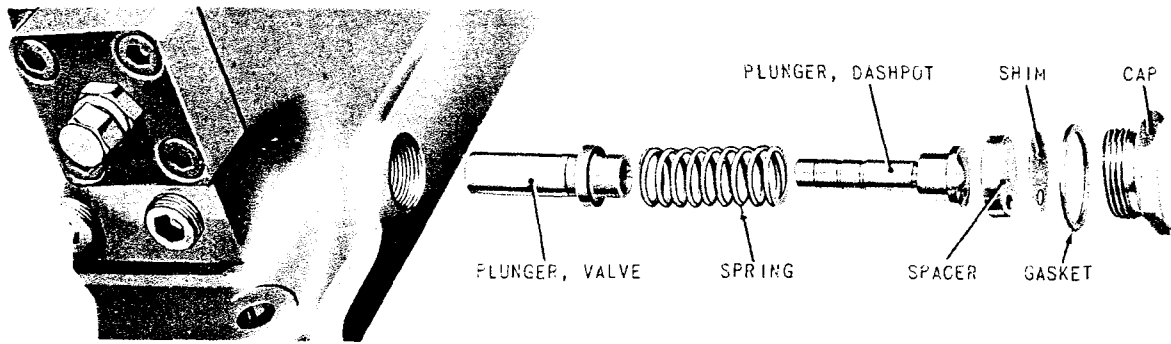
Gear Pump Relief Valve, Assembly, Exploded View
